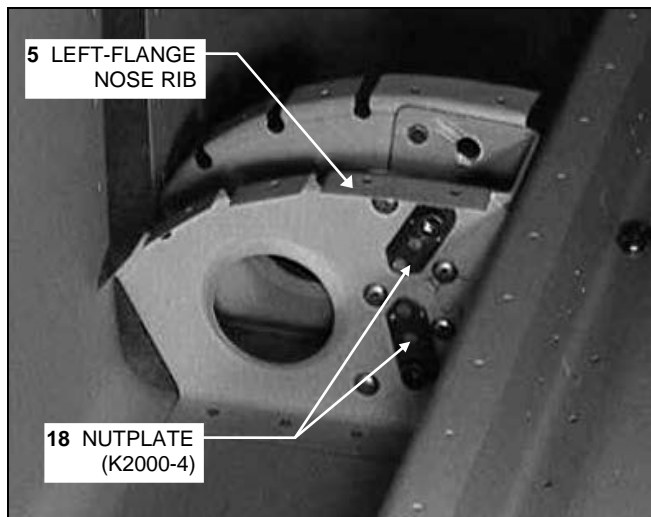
Positioning and Drilling the Hinge and Actuator Bolt Nutplates (Rib Pair C Shown)
